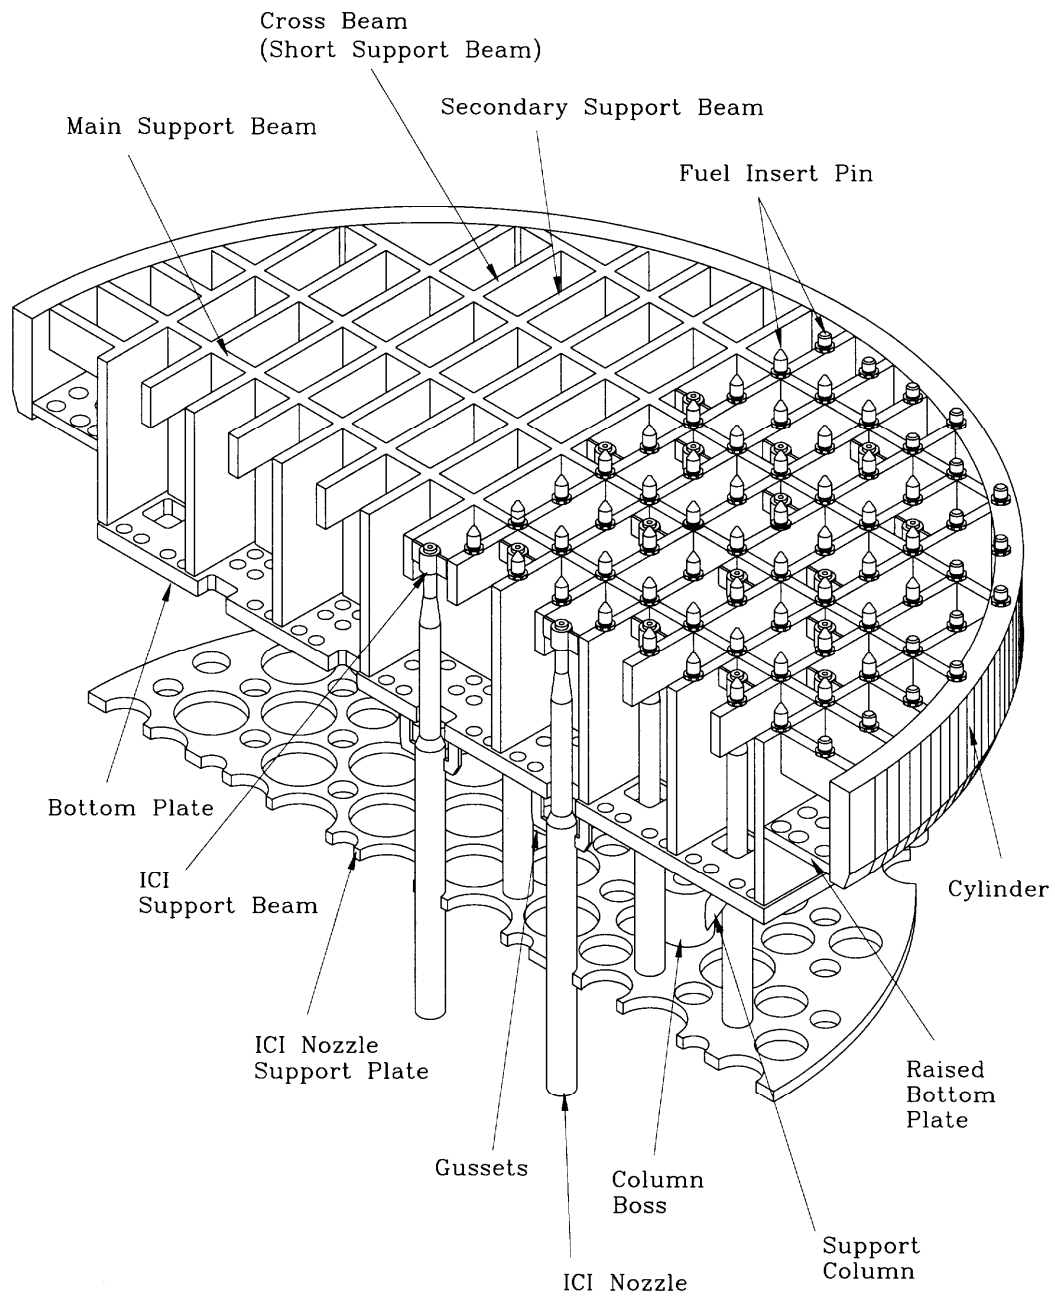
Lower Support Structure /ICI Nozzle Assembly
